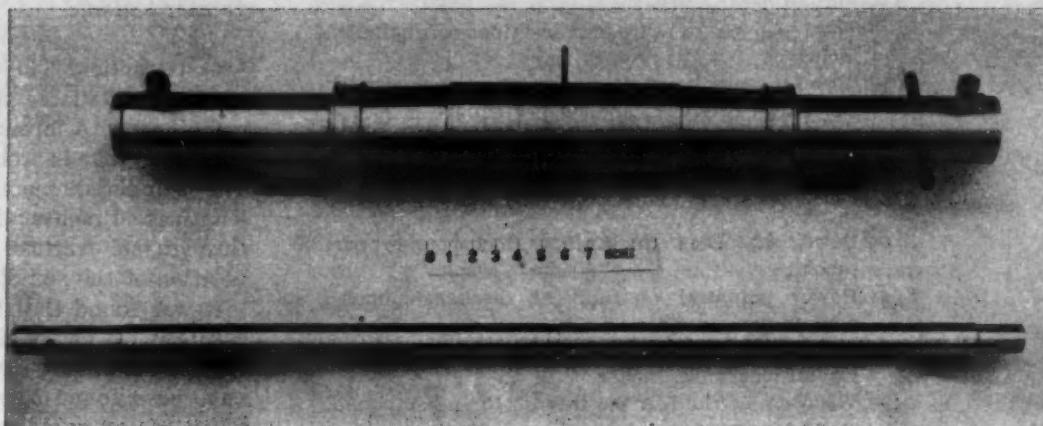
Above — Section through spindle drag pump. Coolant passage is a helical groove in the outer surface of the sleeve
